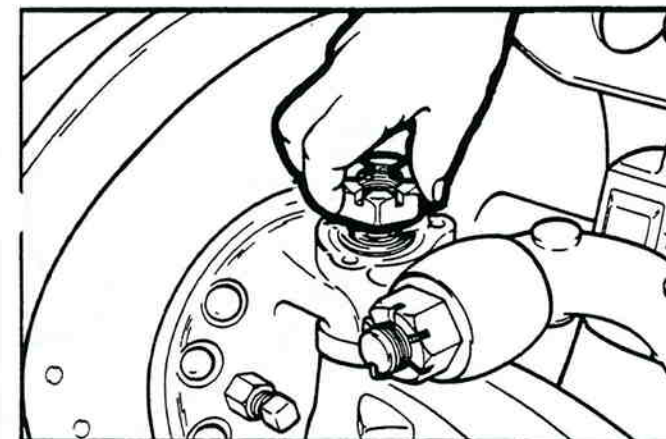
Removing Nut From Top of Tapered Knuckle Pin.
